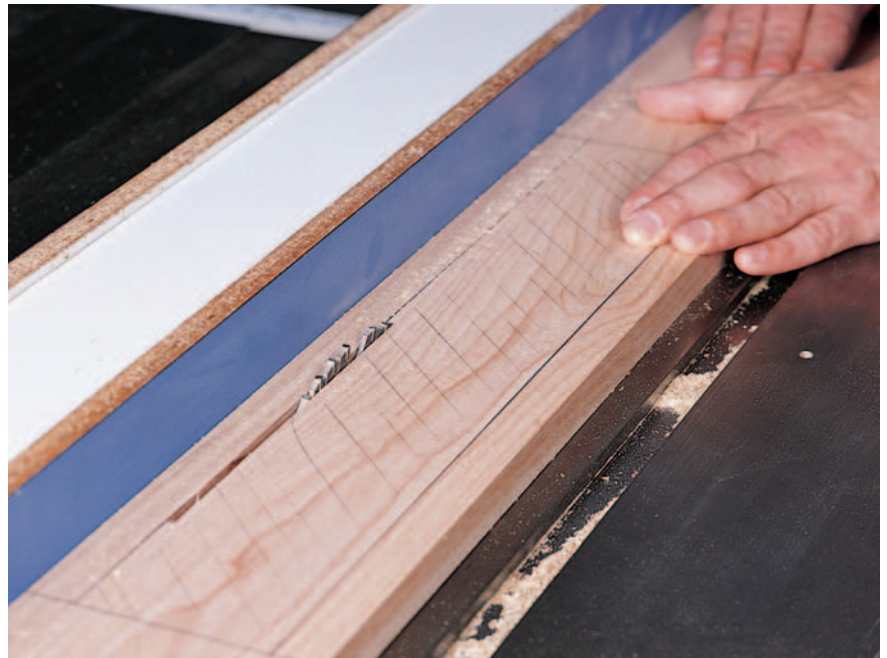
Use your table saw to make the openings in the front and back aprons for the drawers, finishing up with a jig saw.
